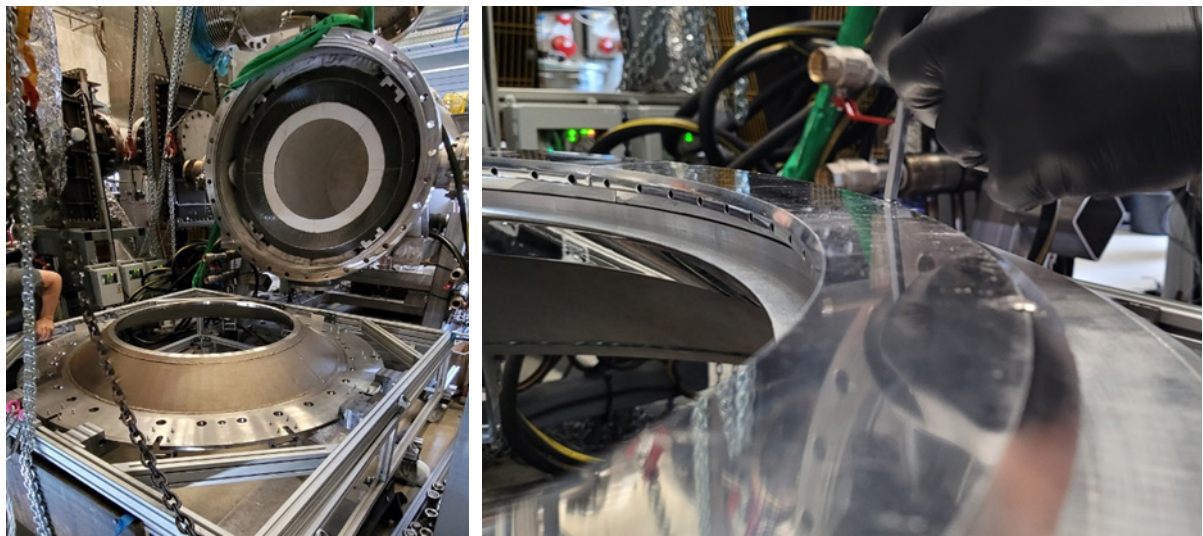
The receiver front is placed horizontally in front of the receiver for the assembly of front components (l.h.s.); mounting of the polished and coated steam ring segments where, on the inner side of the segments, the circular steam outlets can be seen (r.h.s.).
